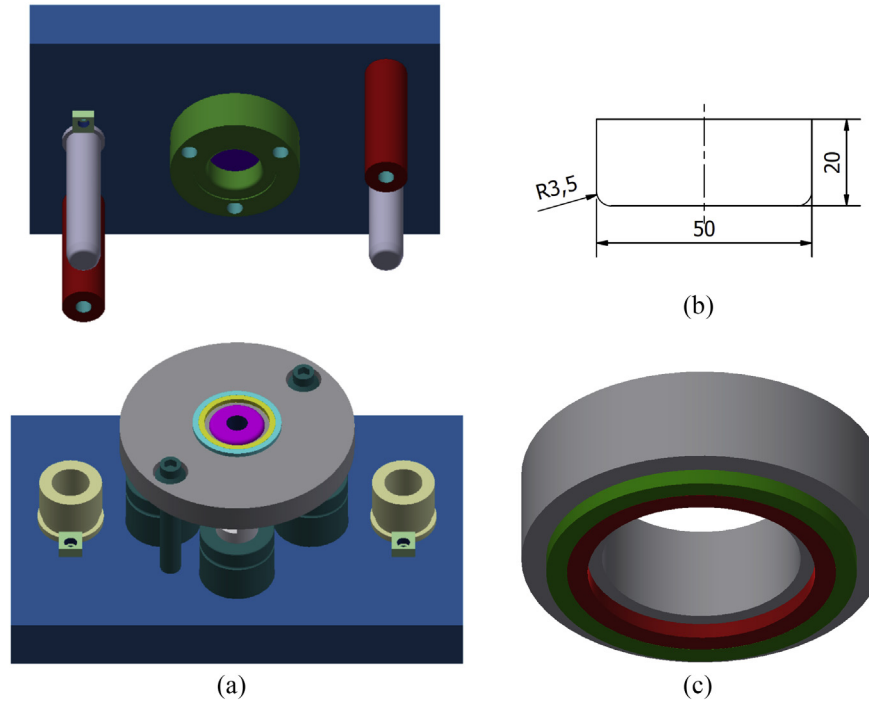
(a) Validation tool modules; (b) part design; (c) blank-holder and segmented ring design (inner ring in red).
